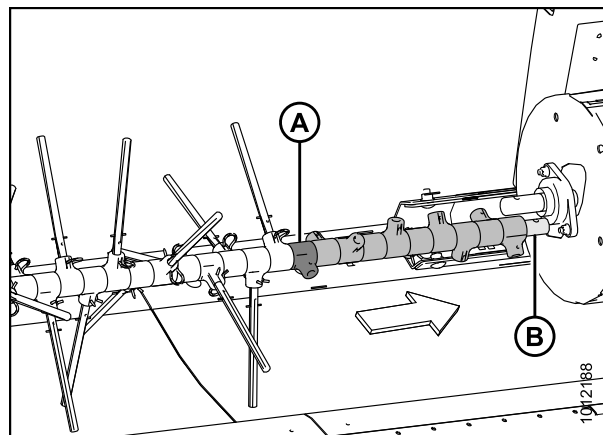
Left Side Auger Finger Bushings (Middle Auger Sheet Removed for Clarity)
